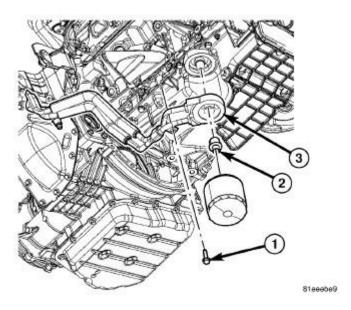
Oil Cooler Fasteners Courtesy of CHRYSLER LLC
